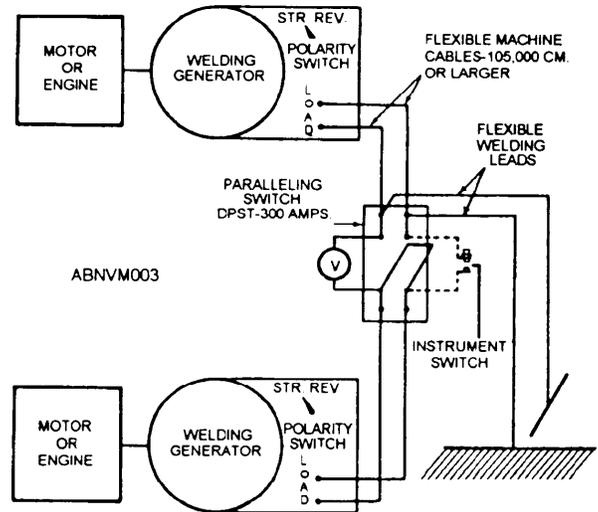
Paralleling connection for a single-operator welding generator.
